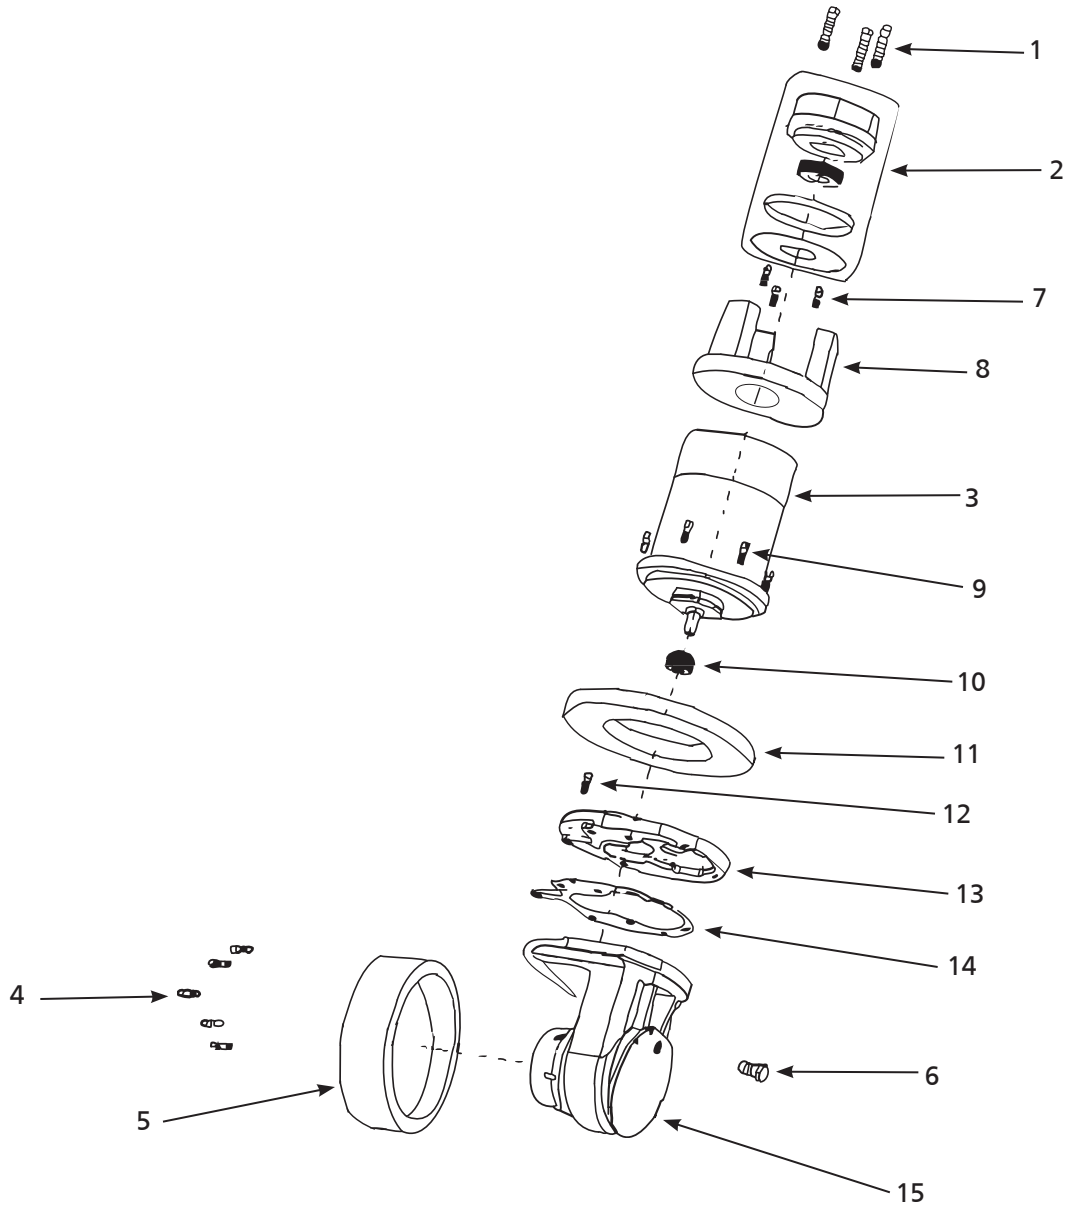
Repair Parts Illustration for Pallet Truck Drive Wheel (Model 2LEB9A)
